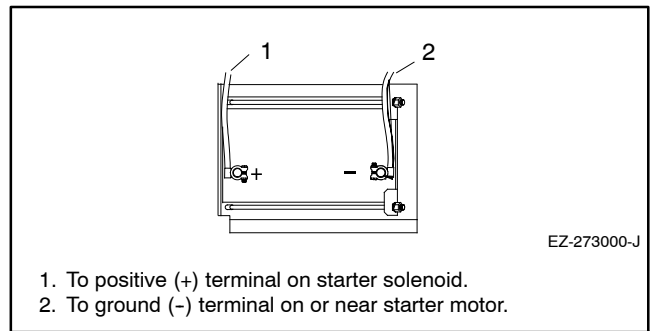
12-Volt Engine Electrical System Single Starter Motor, Typical Battery Connection
